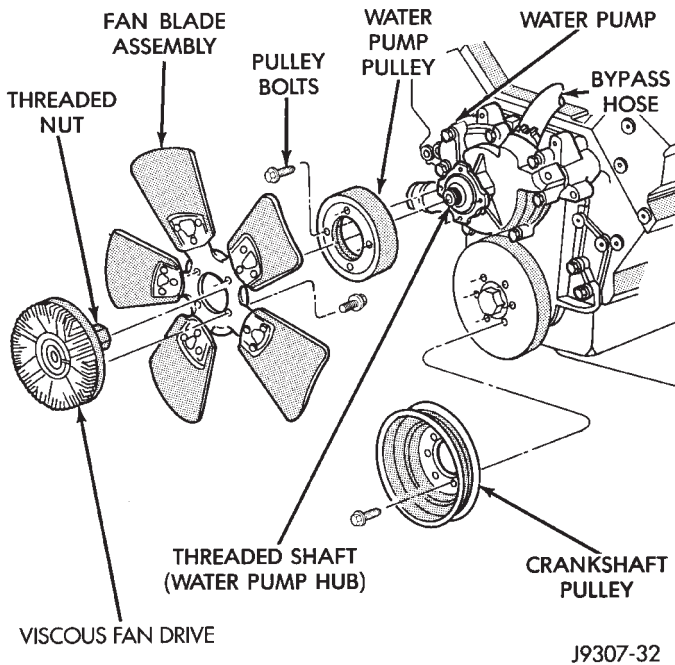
Fan Blade and Viscous Fan Drive—5.2/5.9Engines
